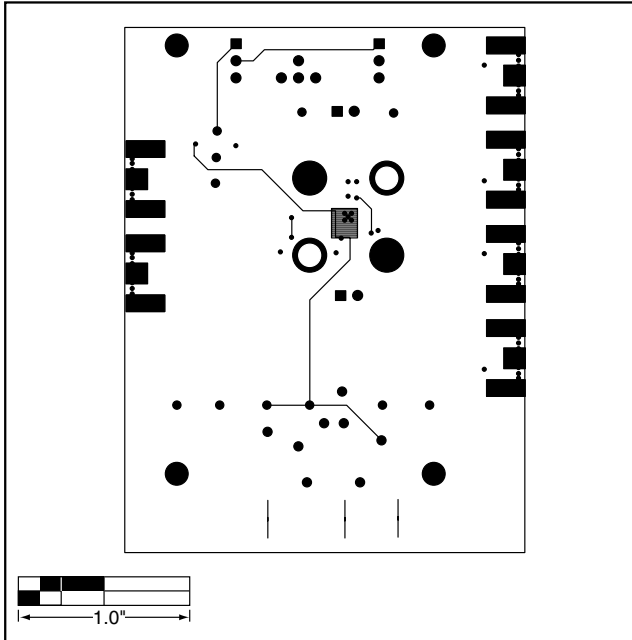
MAX3964ETP EV Kit PC Board Layout—Solder Side
